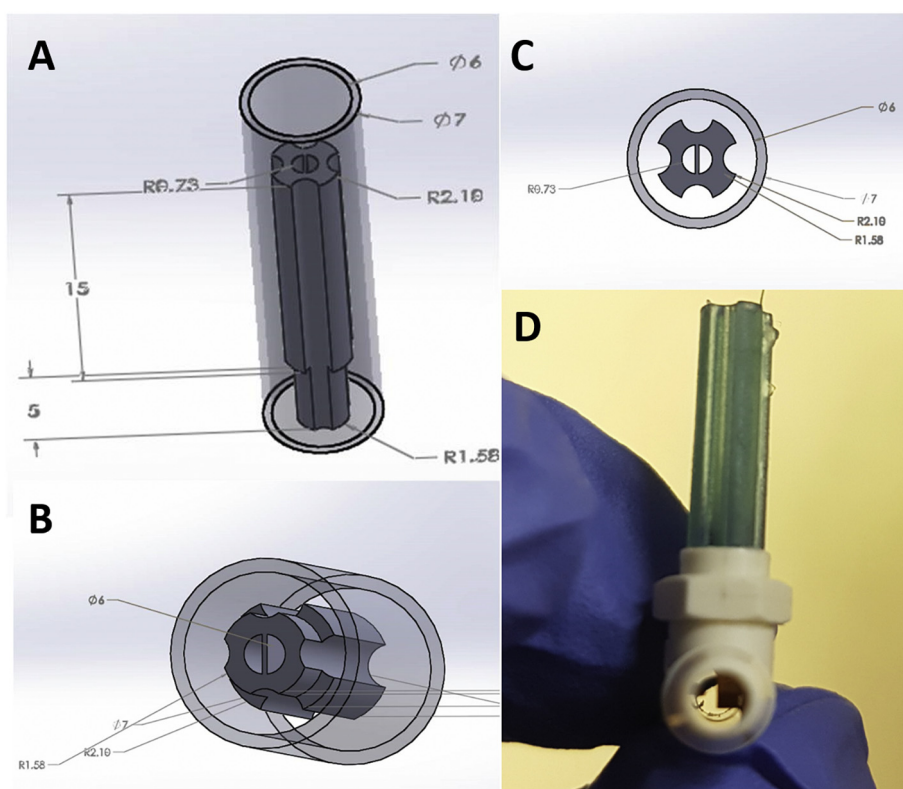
Solidworks rendering of in-line tube: (A) conceptual drawing of the in-line tube, (B) perspective view, (C) cross sectional view, showing the grooved slots for working electrode and (D) 3D printed in-line tube.
